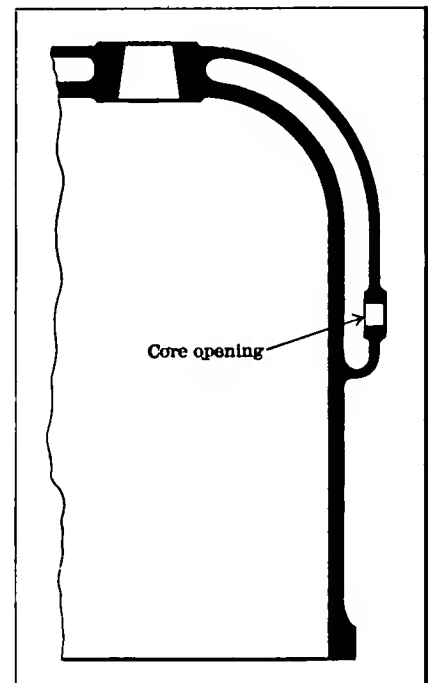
Section, showing core-hole, by means of which the core is suspended in the process of casting
